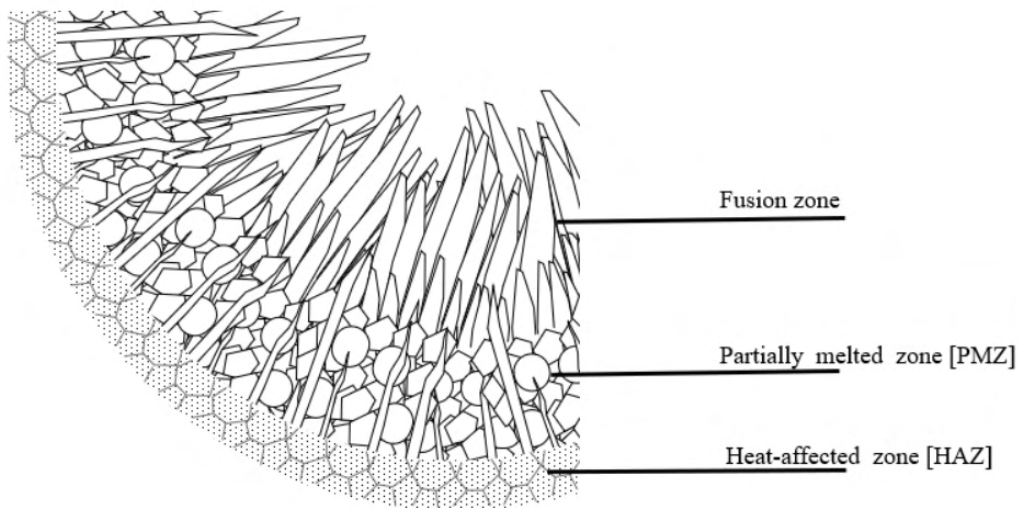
Welding theory and general welding structure, and shows the different zones HAZ, PMZ and fusion zone
